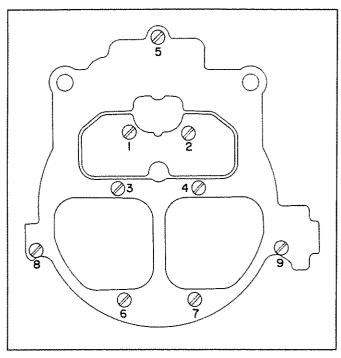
C2-52-Air Horn Screw Tightening Sequence
